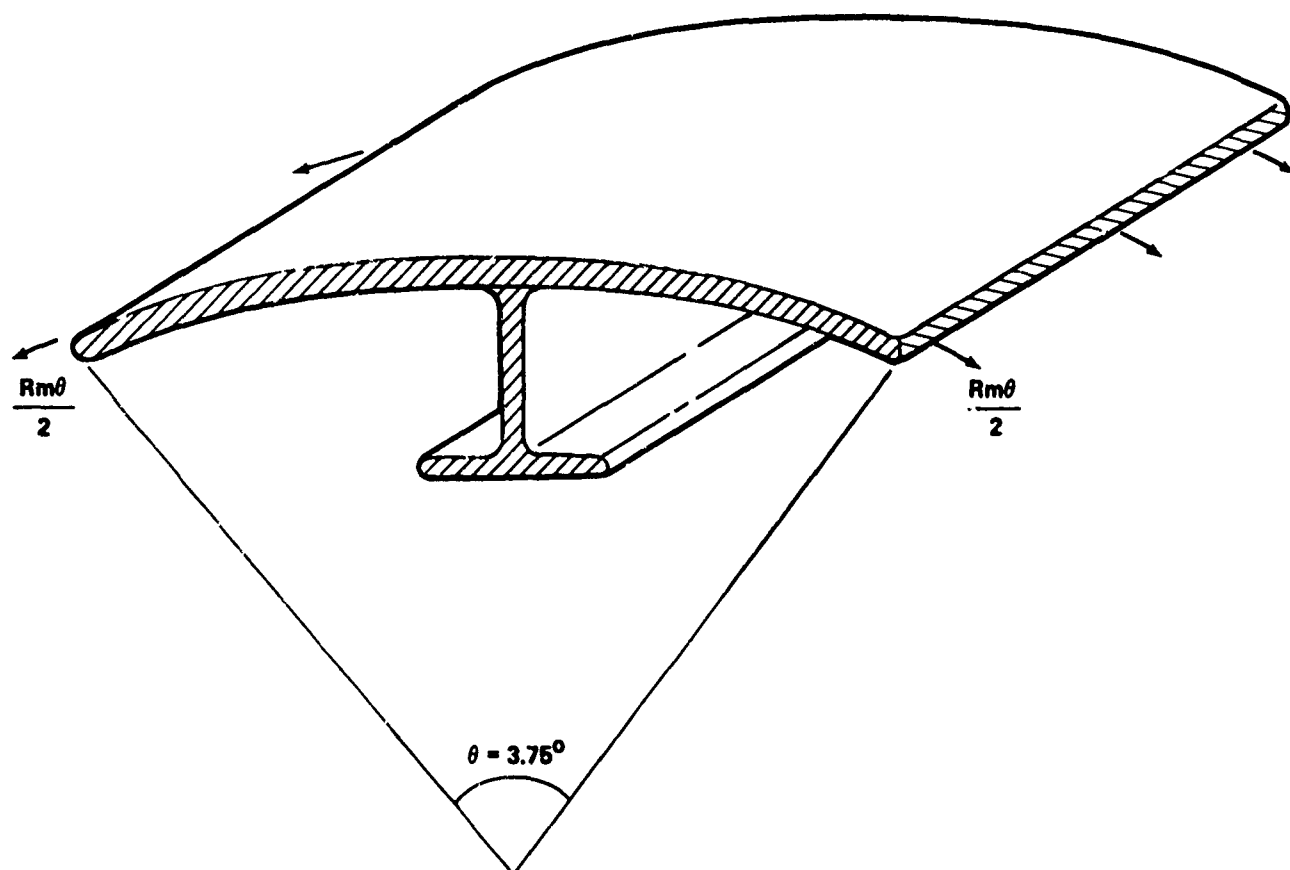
TYPICAL LH₂ TANK BARREL SECTION
